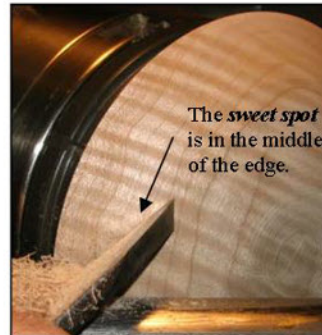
Action! In shear scraping, the edge is angled up (shearing angle), the handle lowered, & the burr is rotated in-line with the wood's movement (NO BEVEL CONTACT)
